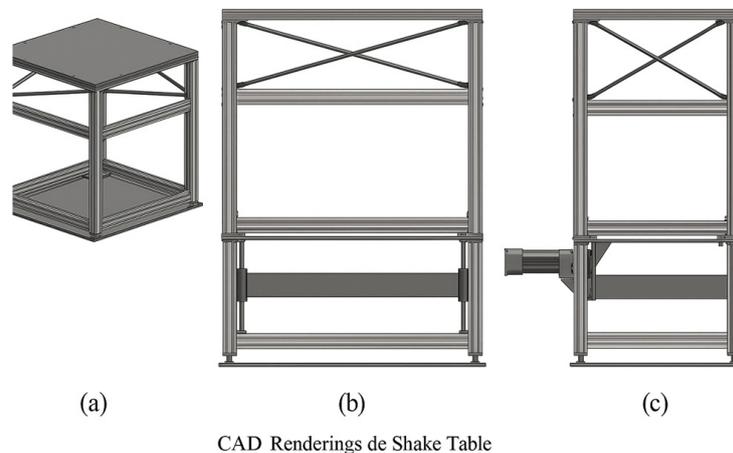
CAD renderings of the shake table structure: (a) Isometric view, (b) Front view, (c) Side view
